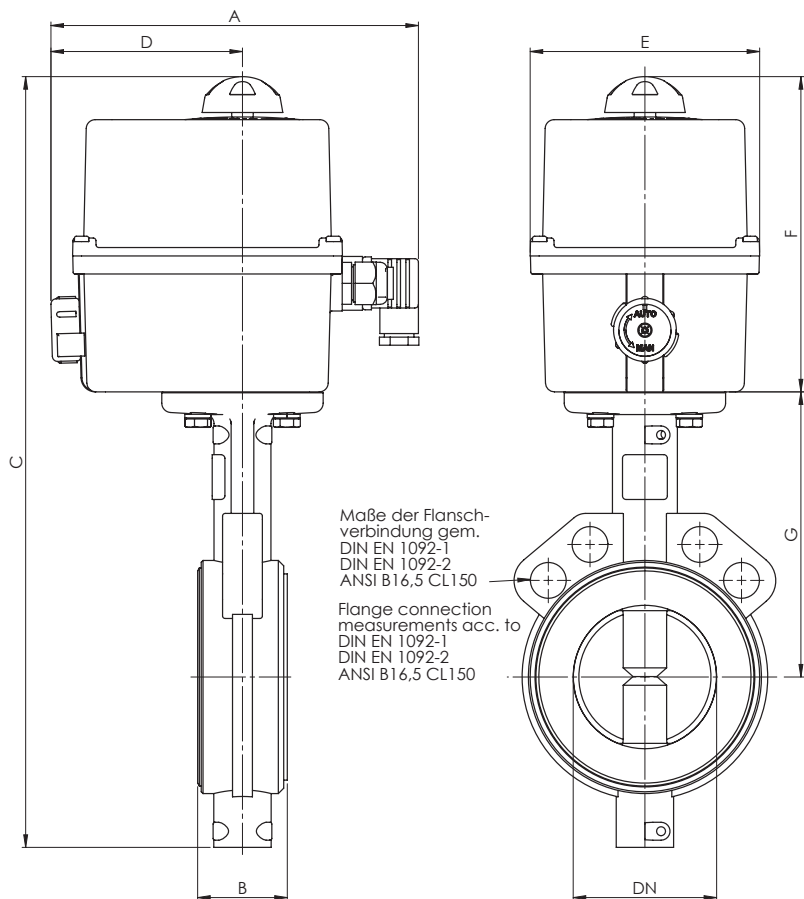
Dimensional drawing Type EZR (exemplary representation with ER Plus rotary actuator)
